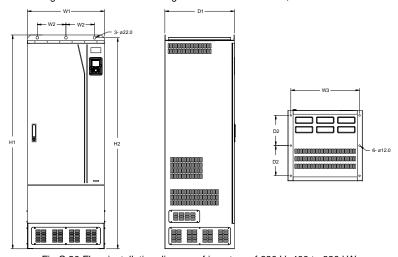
Floor installation diagram of inverters of 660 V, 400 to 630 kW
